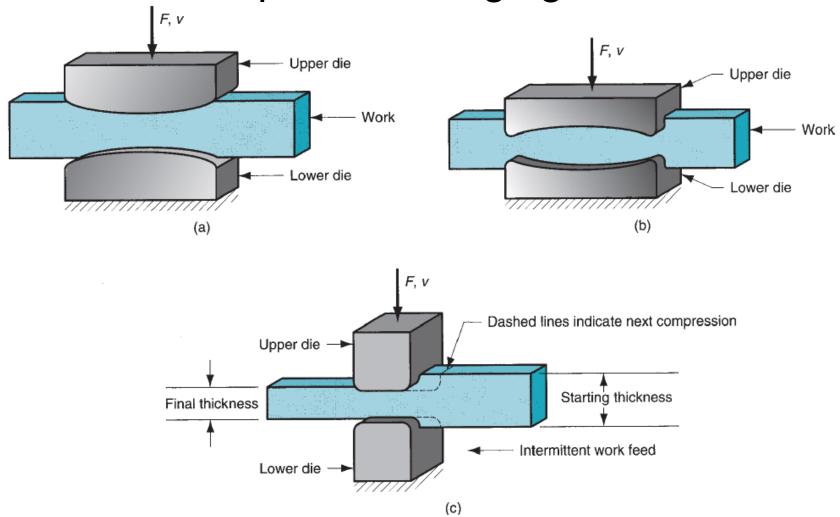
Several open-die forging operations: (a) fullering, (b) edging, and (c) cogging.
